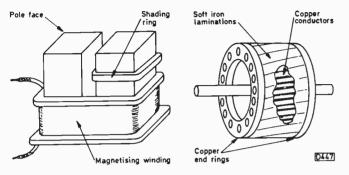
(left): The shaded-pole arrangement. Fig. 4 (right): The squirrel-cage rotor.
